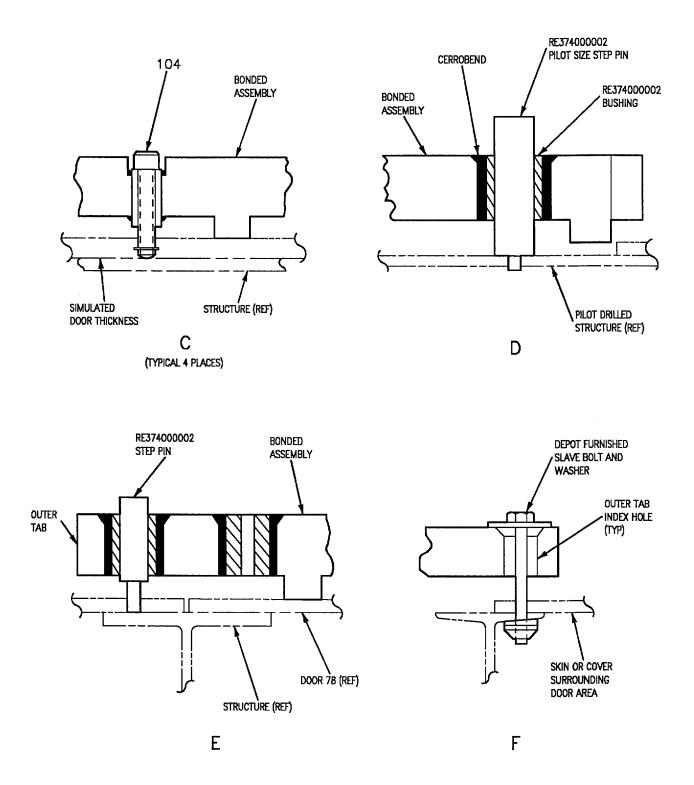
Installation of Plate Set for Drilling Door 78 and Substructure (Sheet 2)
